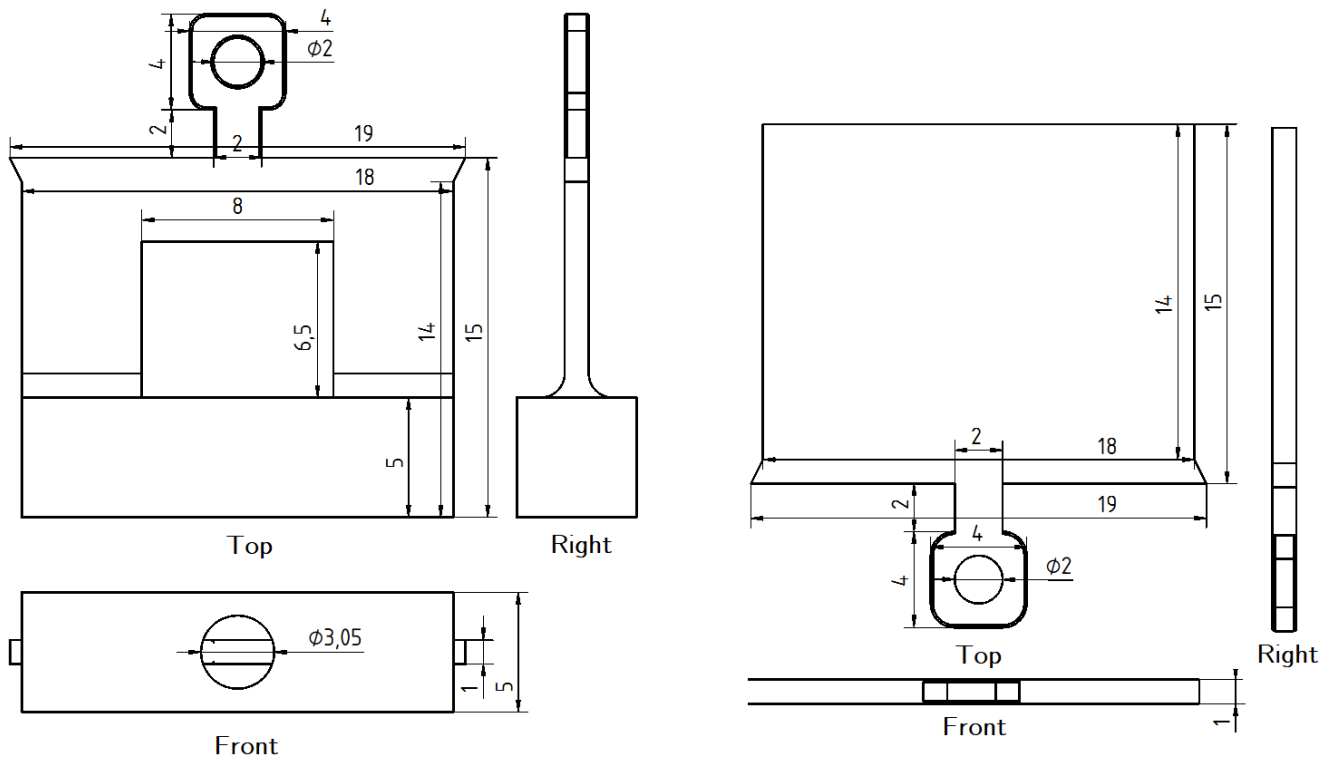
Technical drawing of the improved bulk holder (left), and substrate holder (right). Units of length are in millimeters.
